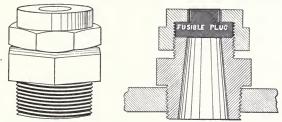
Fusible Plug. At Right is Sectional View of Plug Attached to Crown Sheet of Boller, to Give Automatic Warning in Case of Overheating of Plates.
